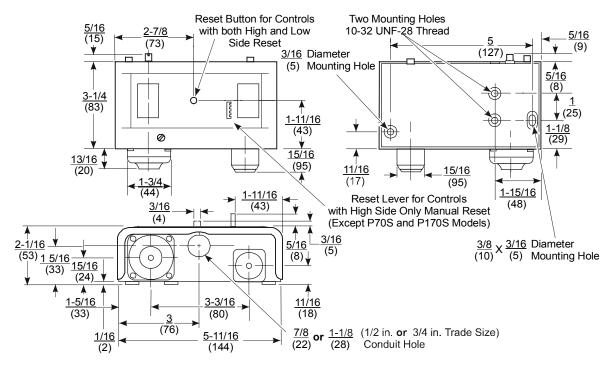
Dimensions for P70, P72, and P170 Dual Pressure Controls with NEMA 1 Enclosure, in. (mm)
